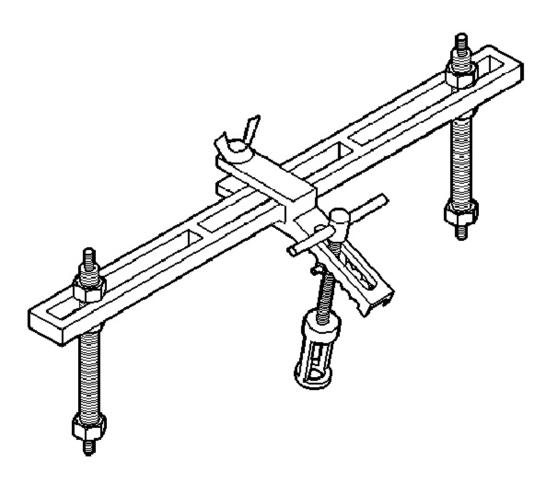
Valve Spring Compressor MD998772A Courtesy of CHRYSLER LLC
